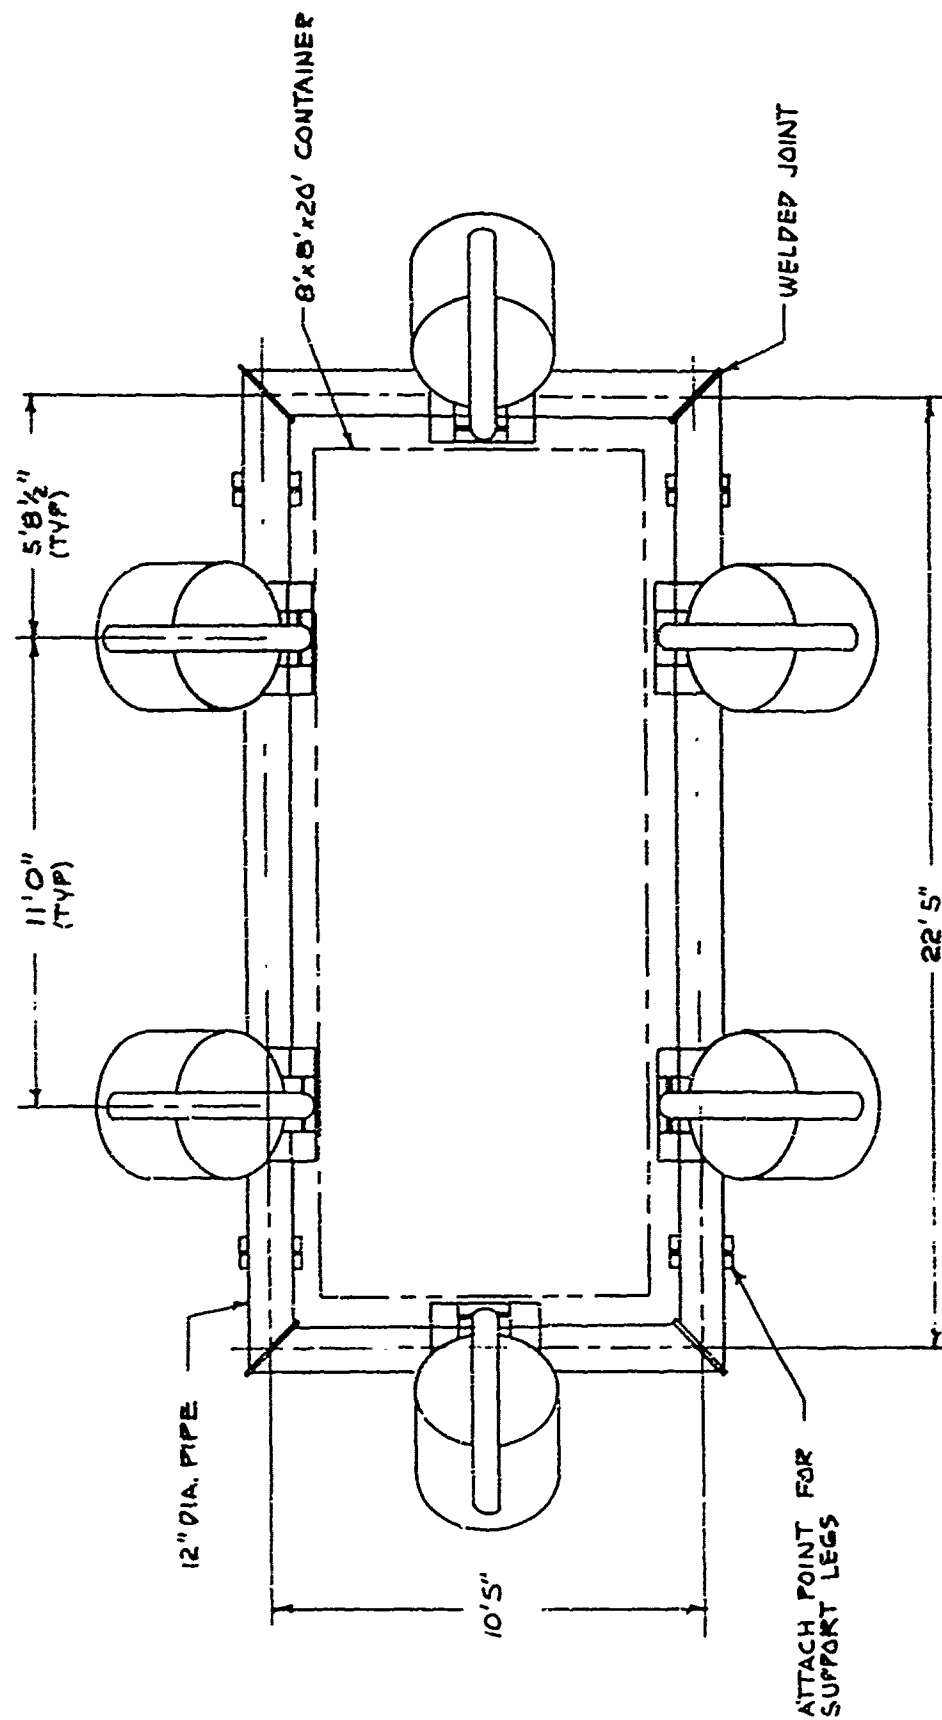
Arrangement of bumpers on pipe support frame (plan view).
